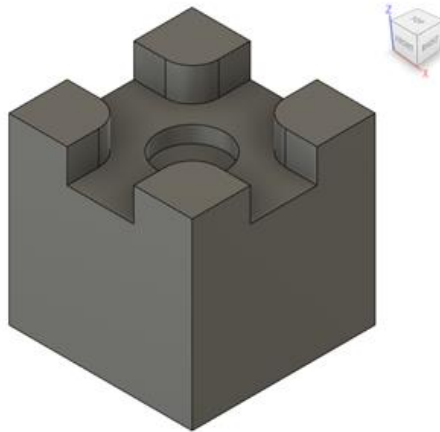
Part1 Machined With 3-Axis, with block dimensions of 55x55x55 mm
